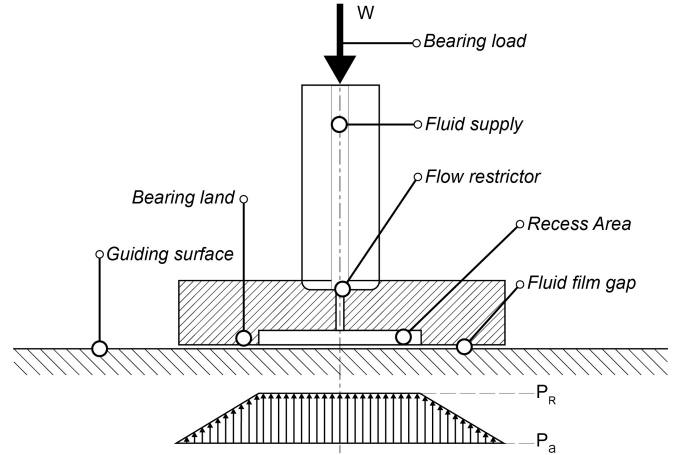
Working principles of single slipper hydrostatic recess bearing. The hydraulic pressure is uniformly defined as the bearing land and guiding surface are parallel. The hydraulic pressure counteracts the axial load W the bearing carries. The hydraulic pressure is visualized below the bearing, with the pressure decreasing to atmospheric pressure throughout the fluid film gap.
